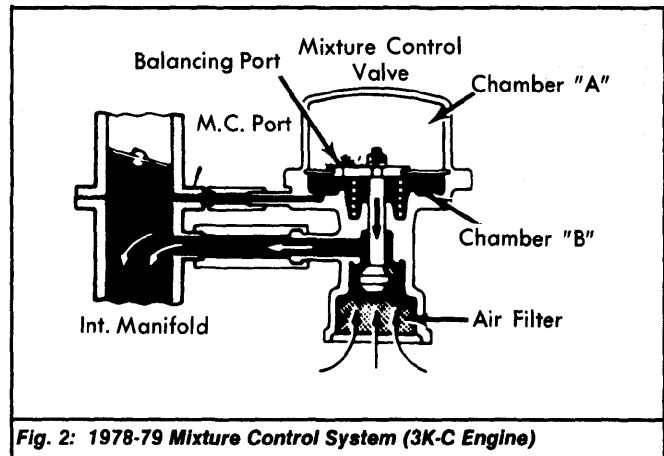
1978-79 Mixture Control System (3K-C Engine)
